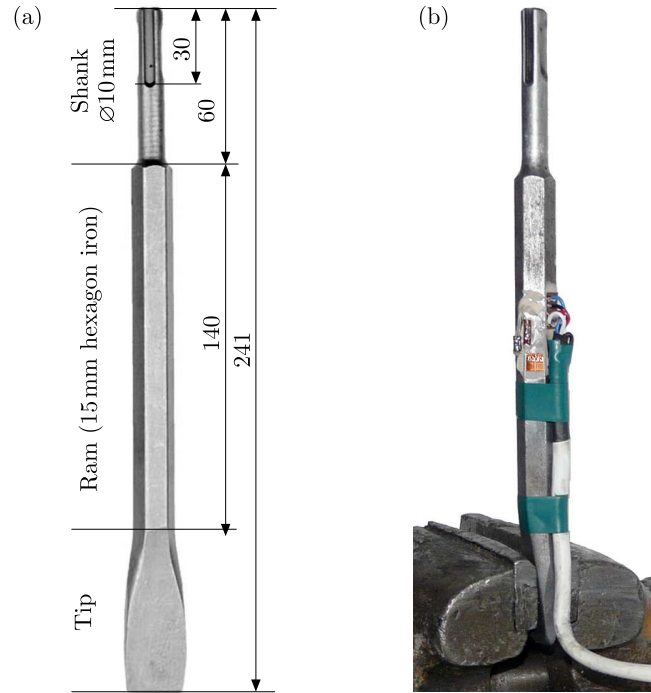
Mechanical system: (a) sections and dimensions of the chisel, (b) fixing of the chisel
